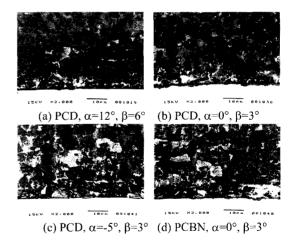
SEM photographs of cutting surface in the side view by various tool shape [WC-Co V60, v=10μm/s t=10μm, ×2,000]
